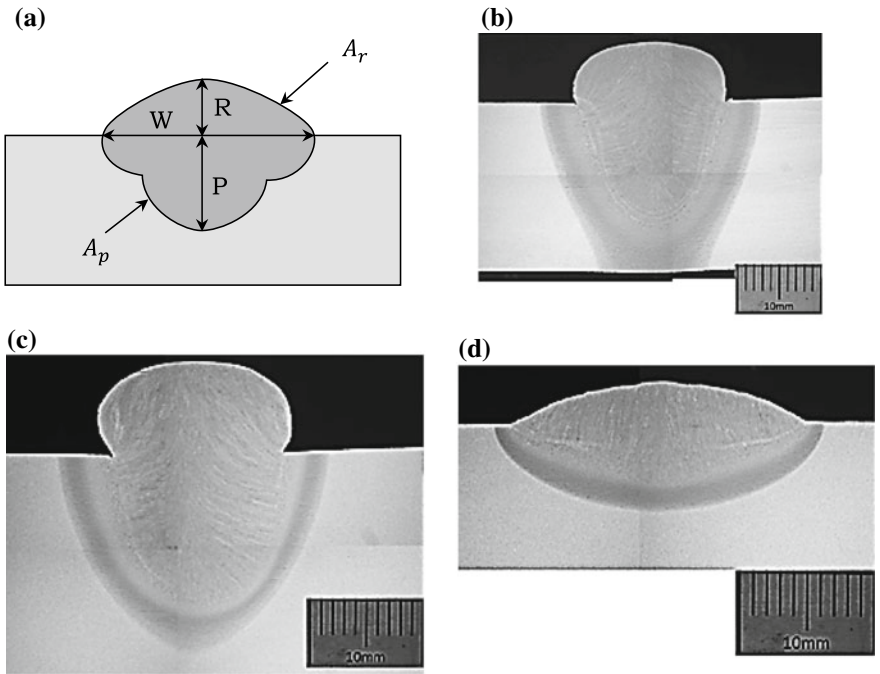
Representation of a weld bead geometry; macrograph of b DCEP c DCEN, and d AC square weld bead
